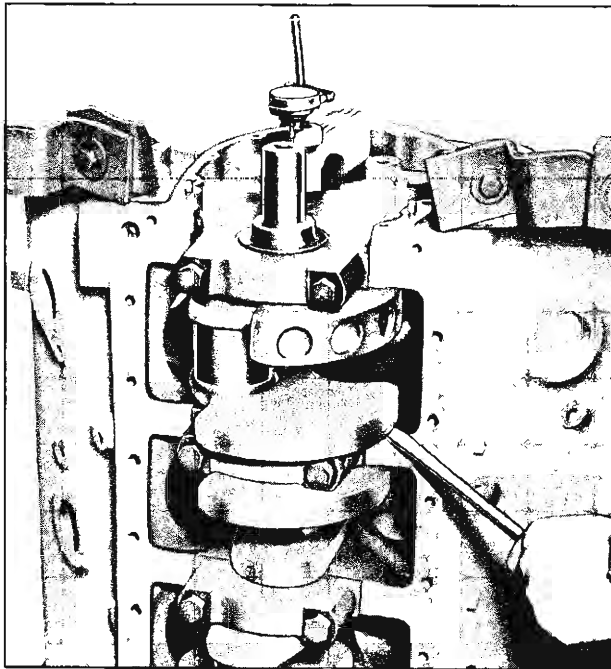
Checking Crankshaft End Play with Engine Out of Vehicle
